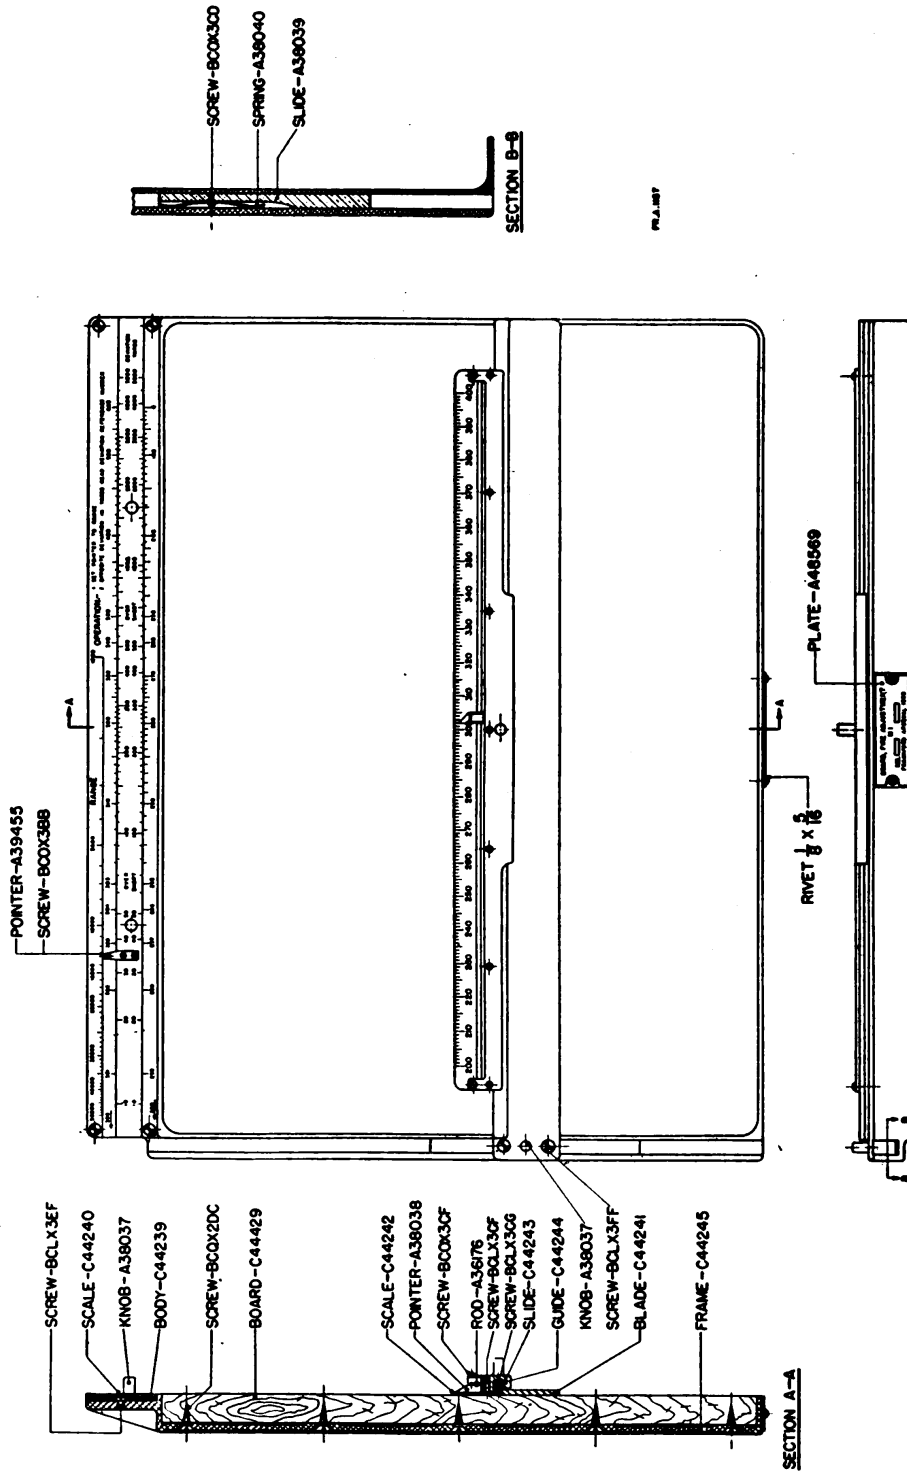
Fire adjustment board M1—assembly and sectioned views.
